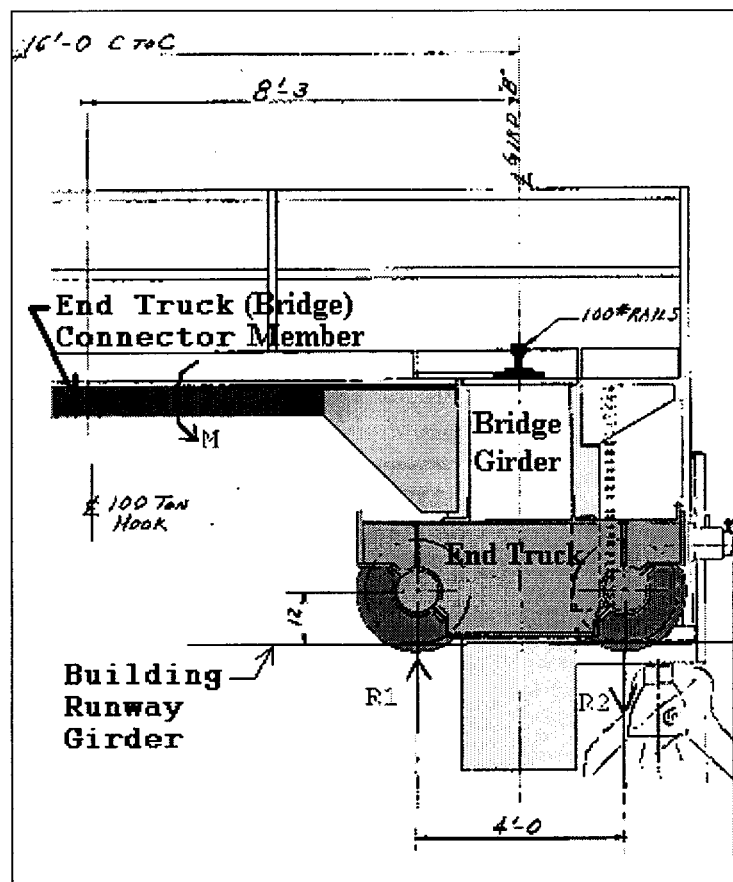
Elevation View of Typical End Truck and Bridge Connector Member
